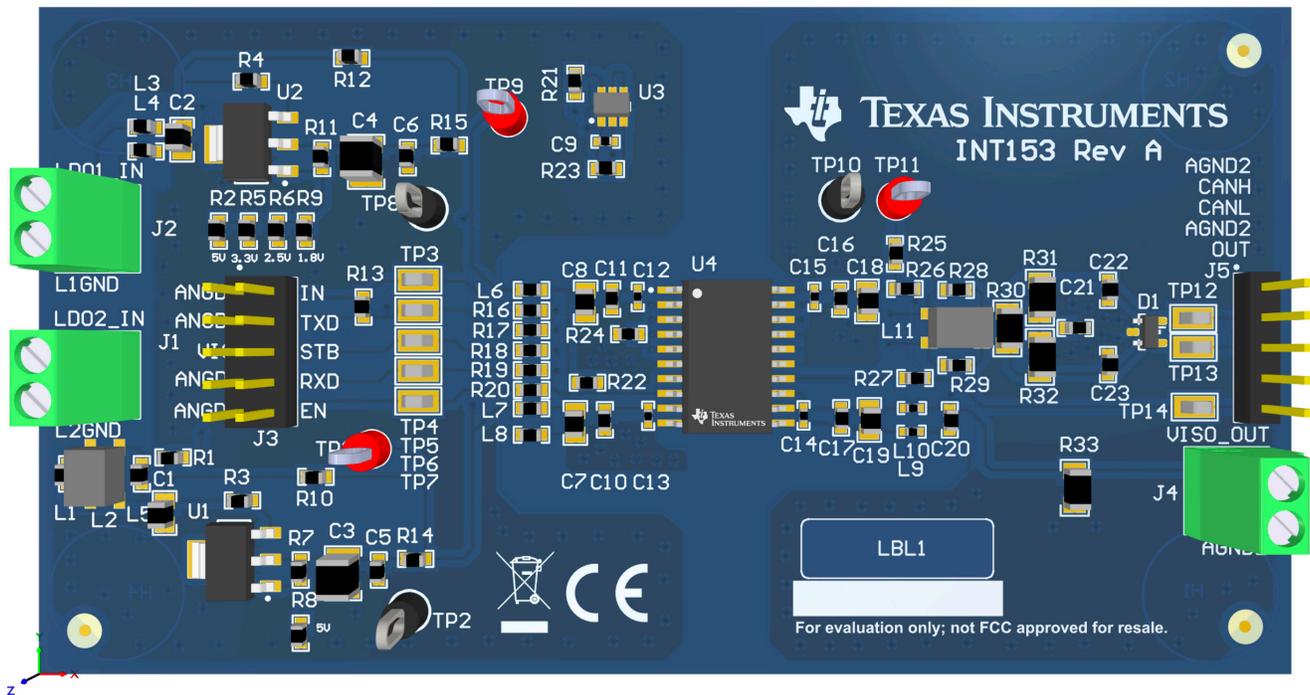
ISOW1044DFMEVM PCB 3D Diagram
